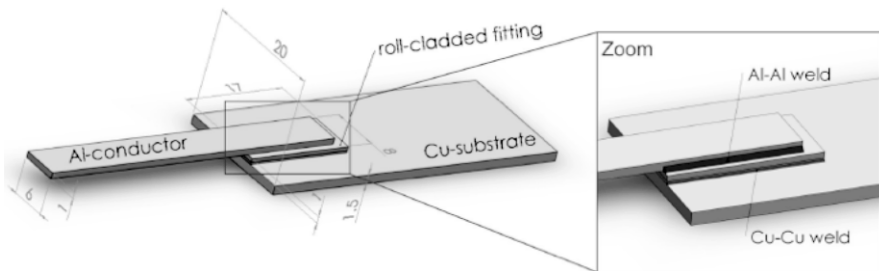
Joining geometry for the welding tests with roll-cladded fittings
